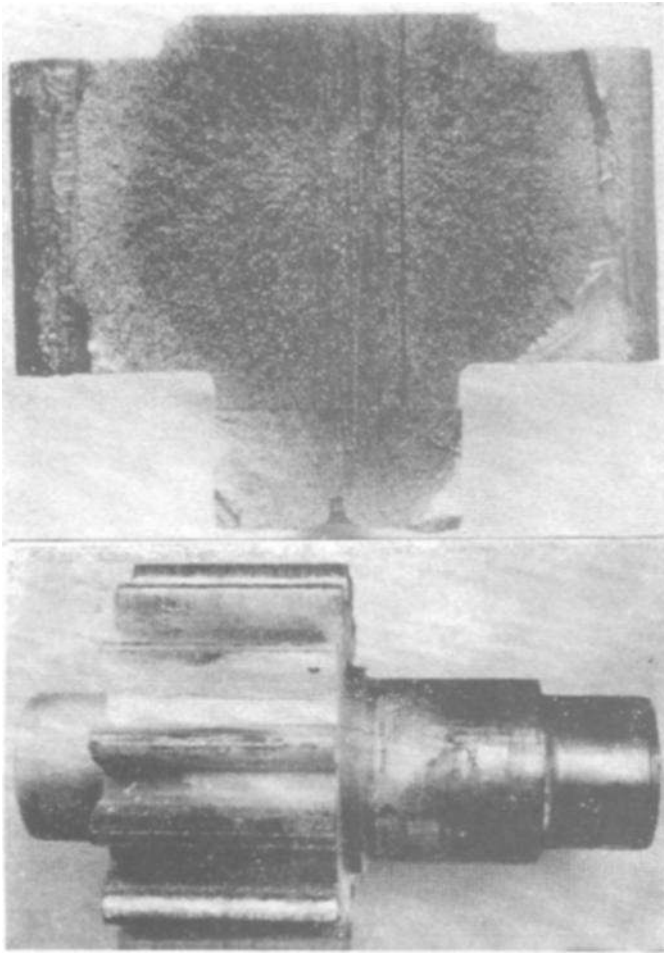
An excavator pinion about 18 in. (450 mm) in diameter that was removed from service because of visible longitudinal cracking. The cause was an original internal forging burst that propagated during heat treatment and then propagated further outwards by fatigue in service. The cracking could have been detected during machining, as well as by surface NDE.
